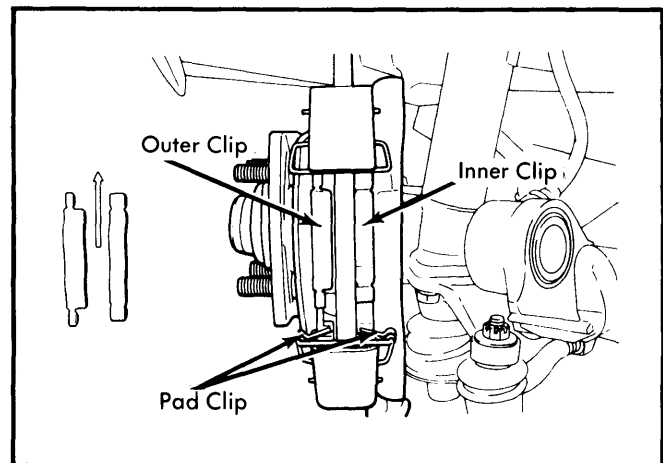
Installing Pad Retaining Clips on Front Disc Brakes of Challenger, Sapporo and Colt St. Wgn.
